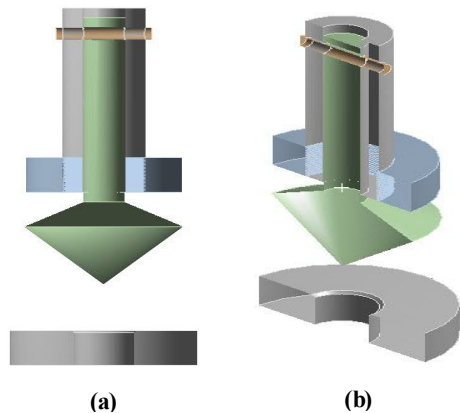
Mechanism of chamfering tool set ((a) 2-D and (b) analytical 3-D)
